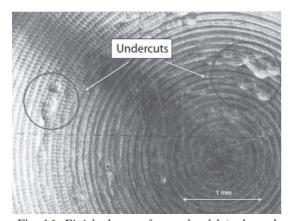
Finished part after toolpath1 (enlarged 30-times)
